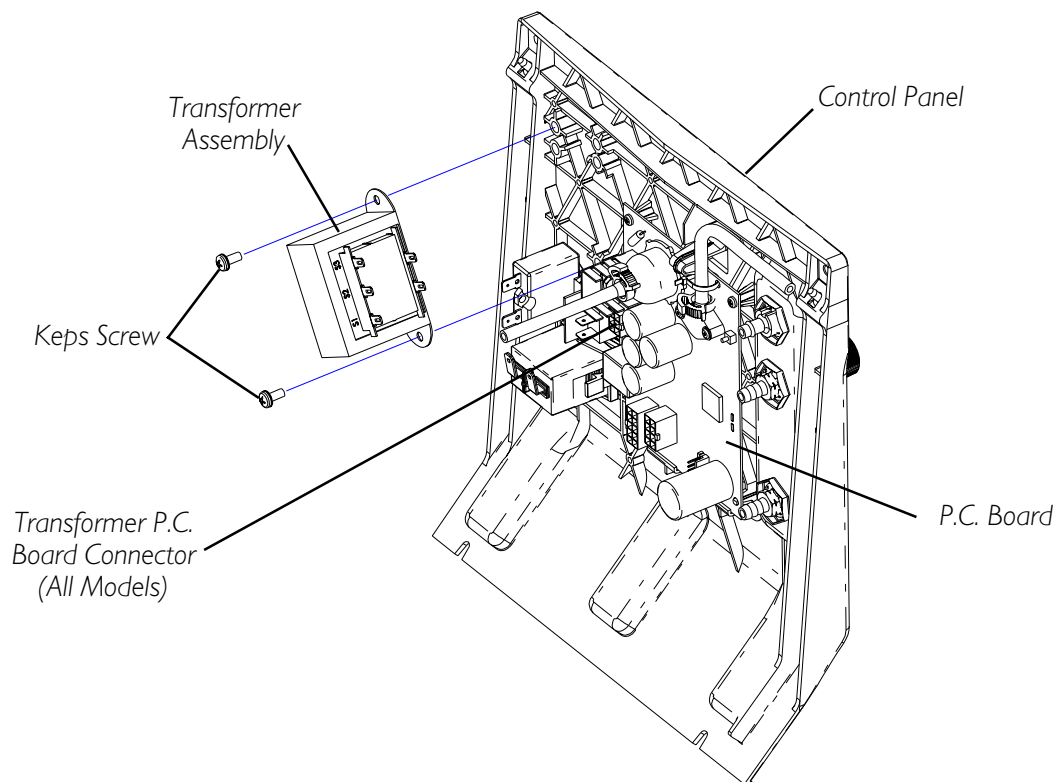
REPLACING TRANSFORMER ASSEMBLY
